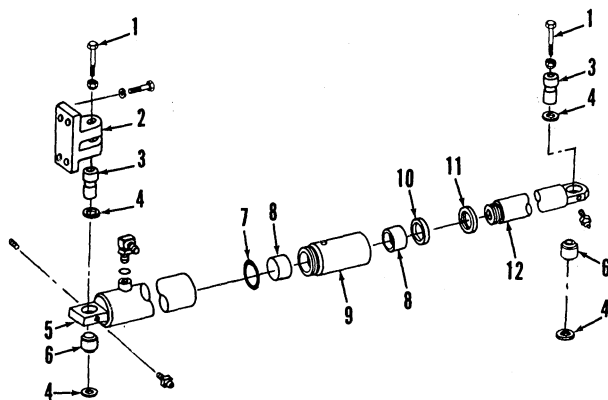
Exploded view of steering assist cylinder used on some tractors equipped with mechanical front-wheel drive.
